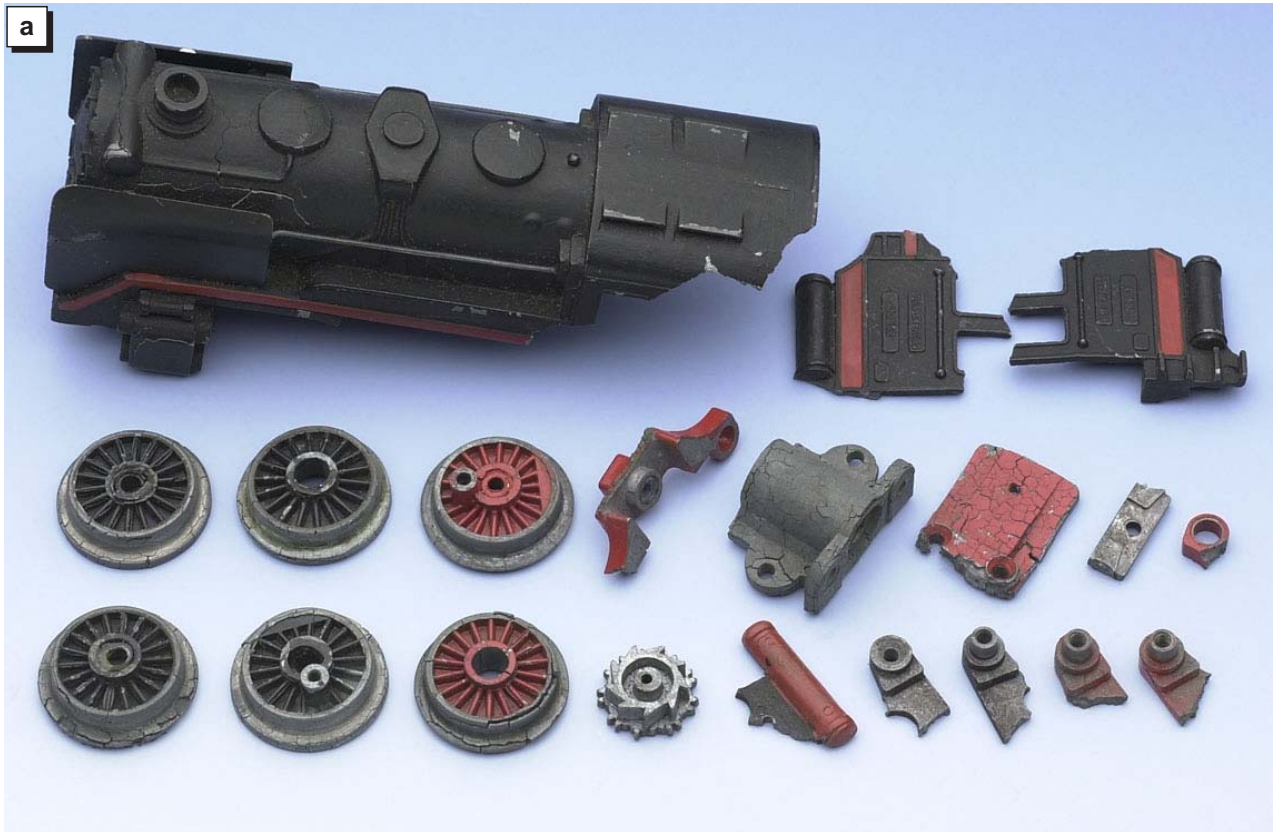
Severe corrosion-induced cracking in a zinc-aluminium die cast model locomotive, vintage 1946-1947. The details in figures 1b and 1c show part of a wheel and a block fitting
